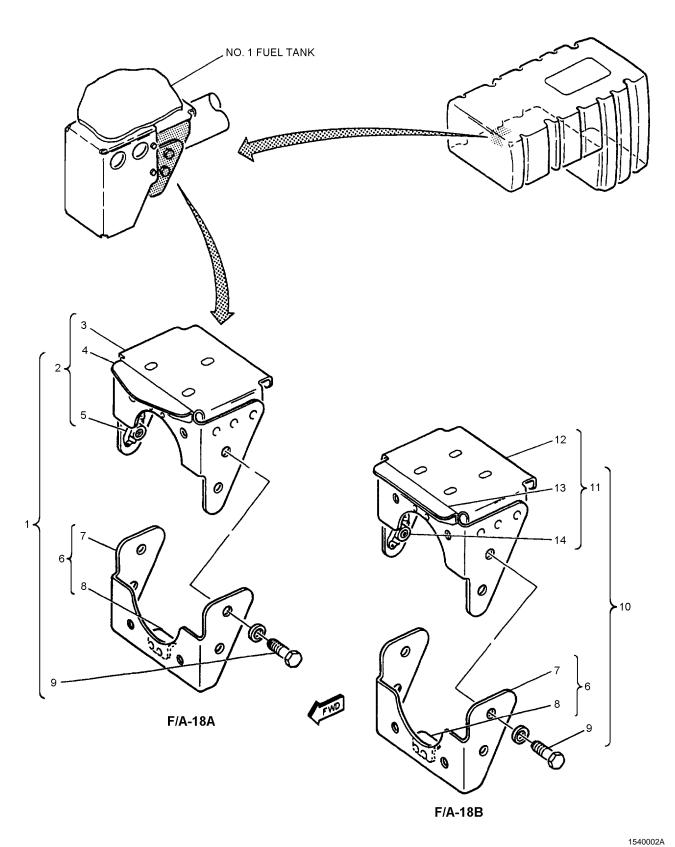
No. 1 Fuel Tank Climb Vent Check Valve Bracket Assembly (Sheet 1)
